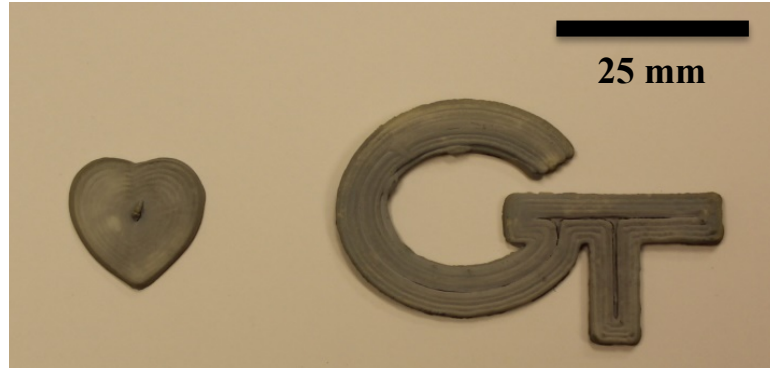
Images of fabricated ceramic parts made using complex geometries.
